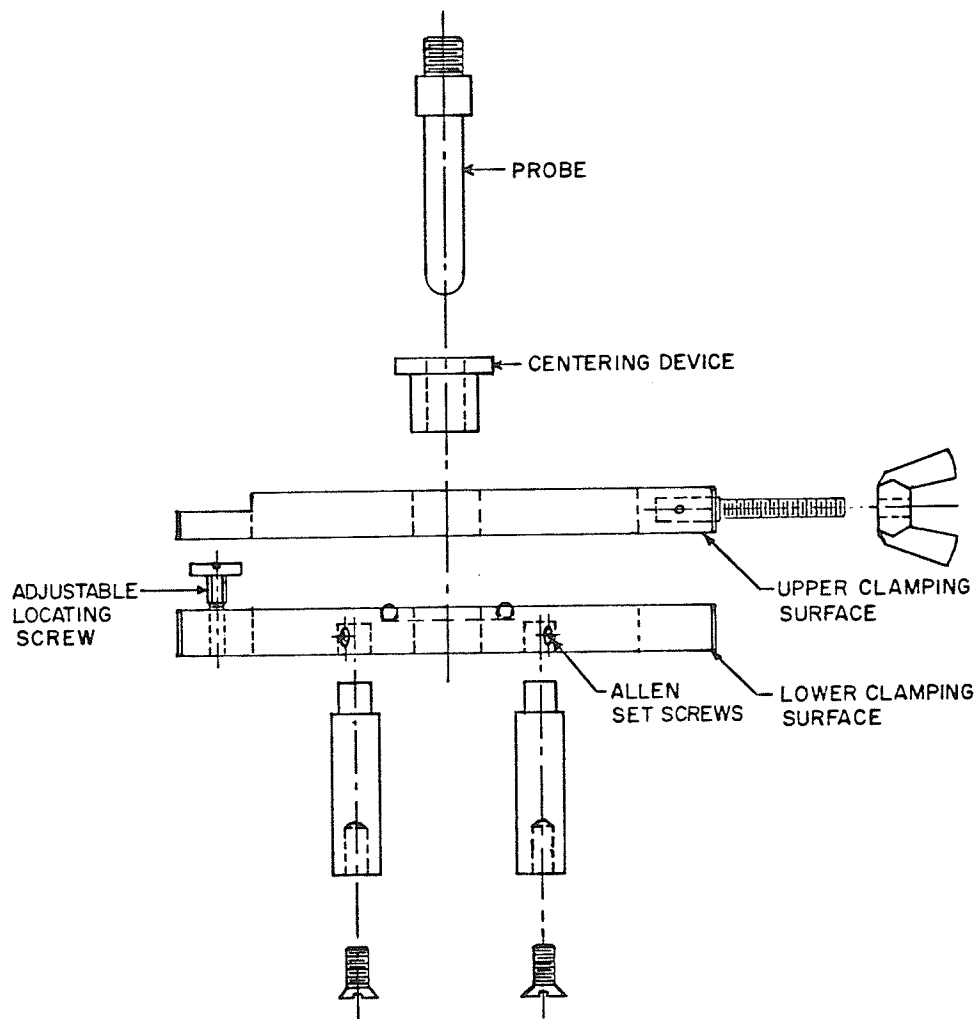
Fabric Clamp for Mini-Probe Tester with Allen Screws for Adjustment of Position of Lower Clamping Plate and Centering Device for Probes
